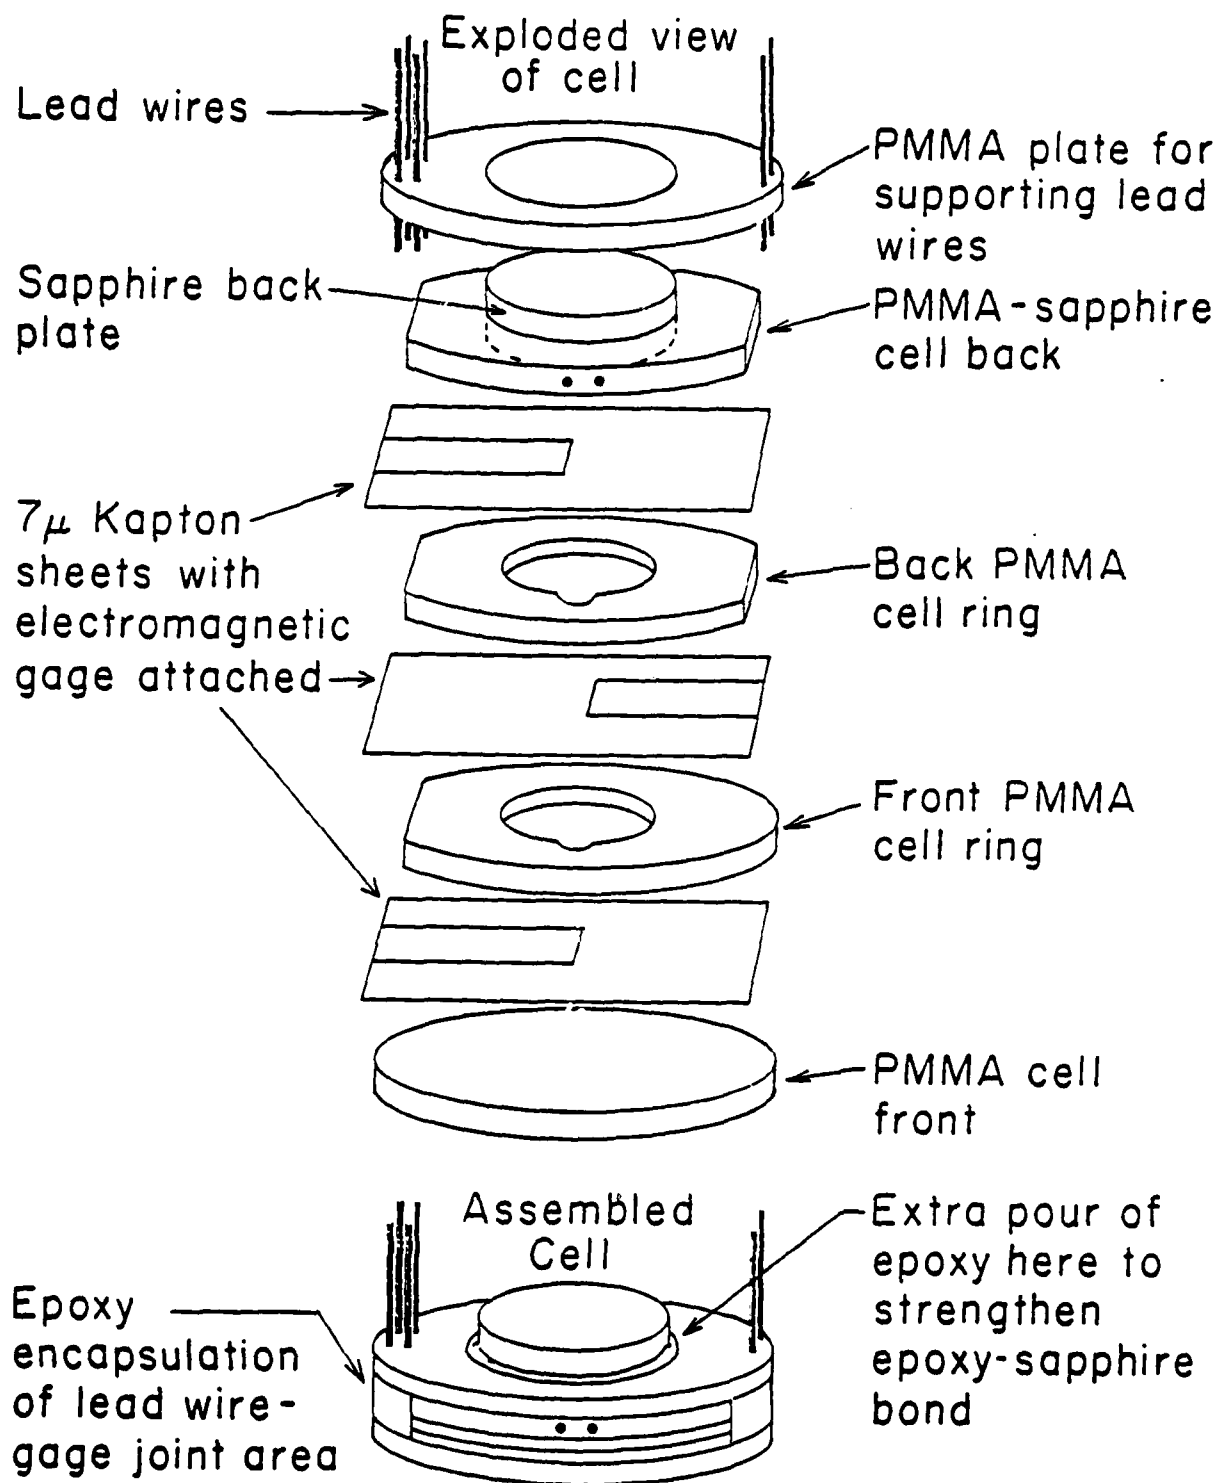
Exploded View of a Three Gage CS₂ Cell. The cell is assembled by epoxying the various layers together.
